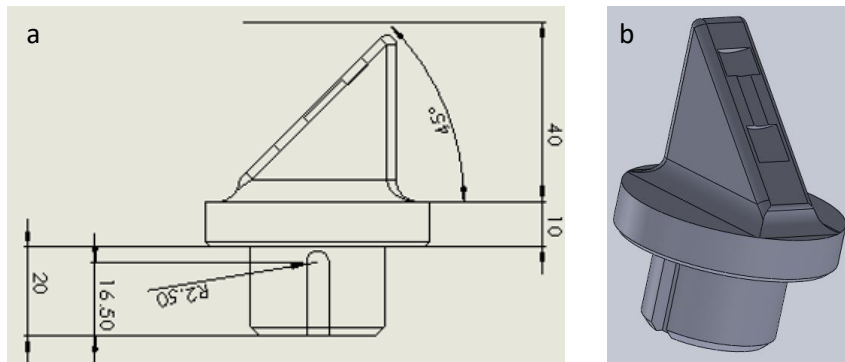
a) 45° fixture drawing b) 45° fixture 3D model
